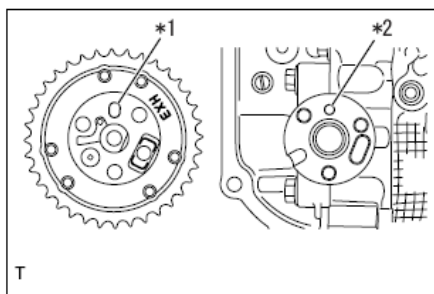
Securing Camshaft Timing Intake Gear Assembly Using SST
